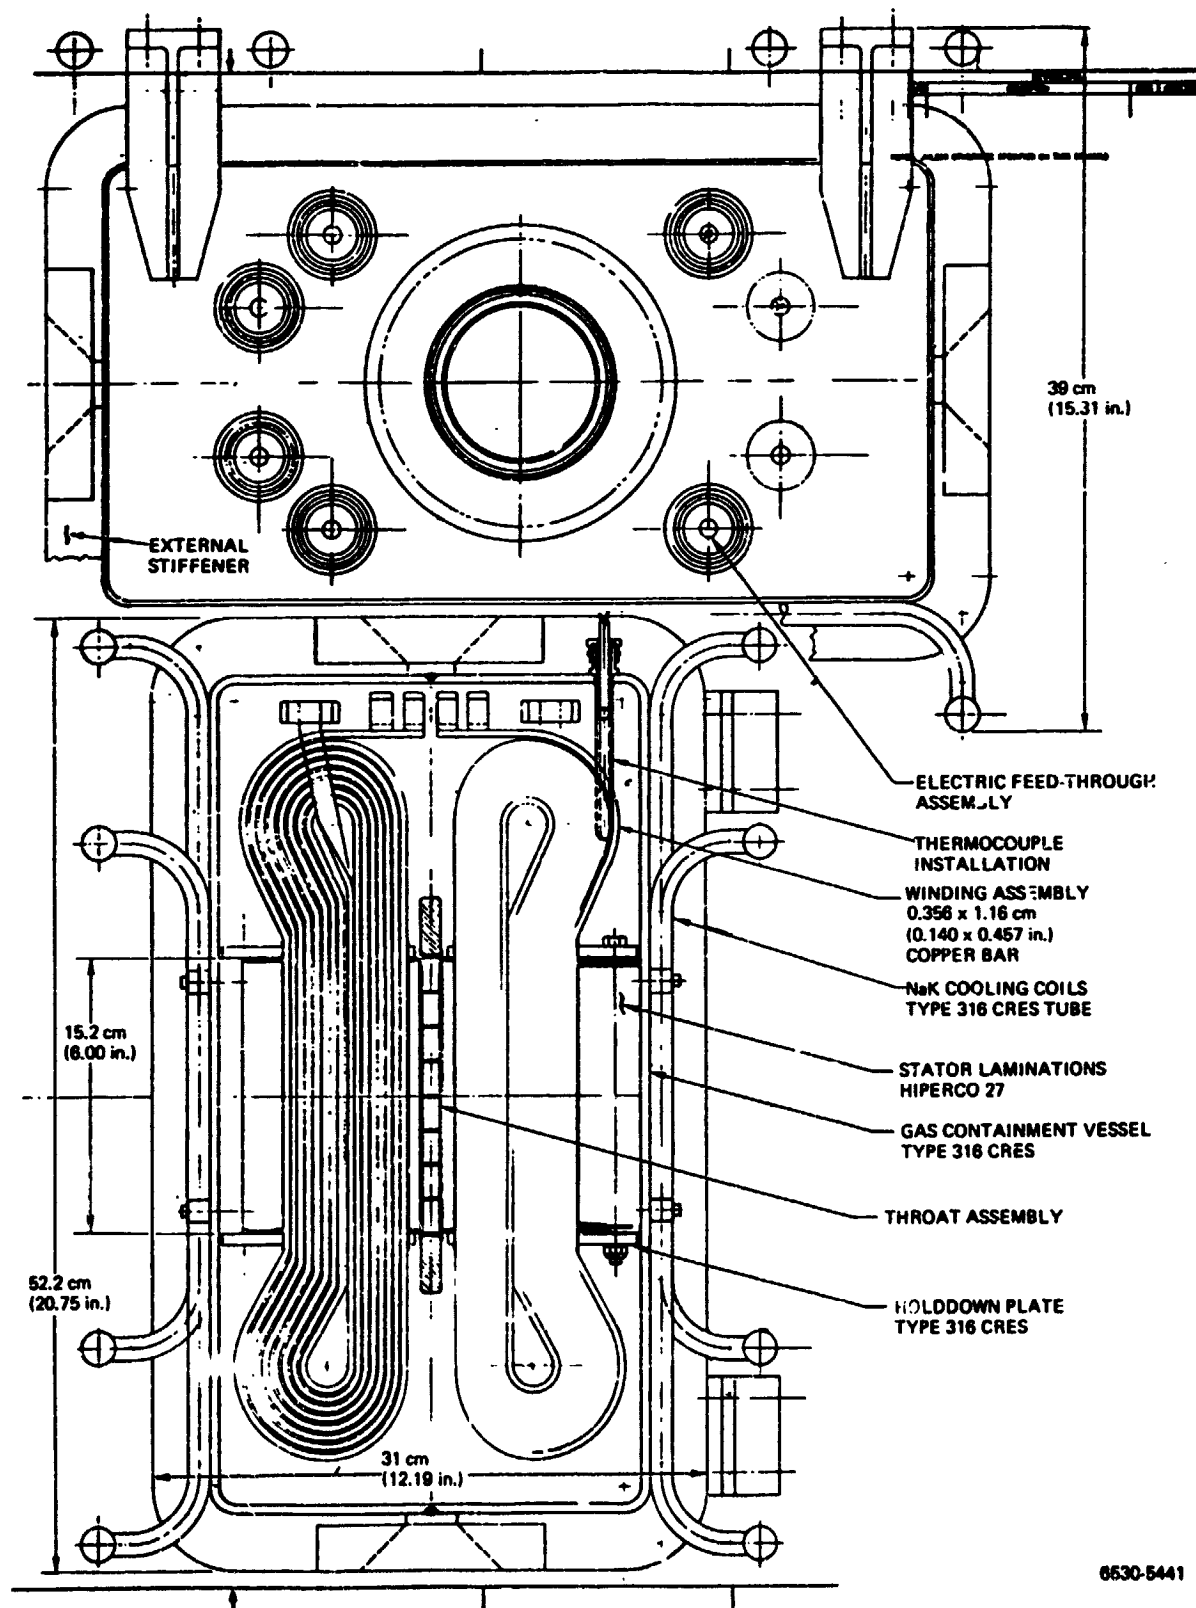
End Views of Linear Pump (Dwg. N530310001)
